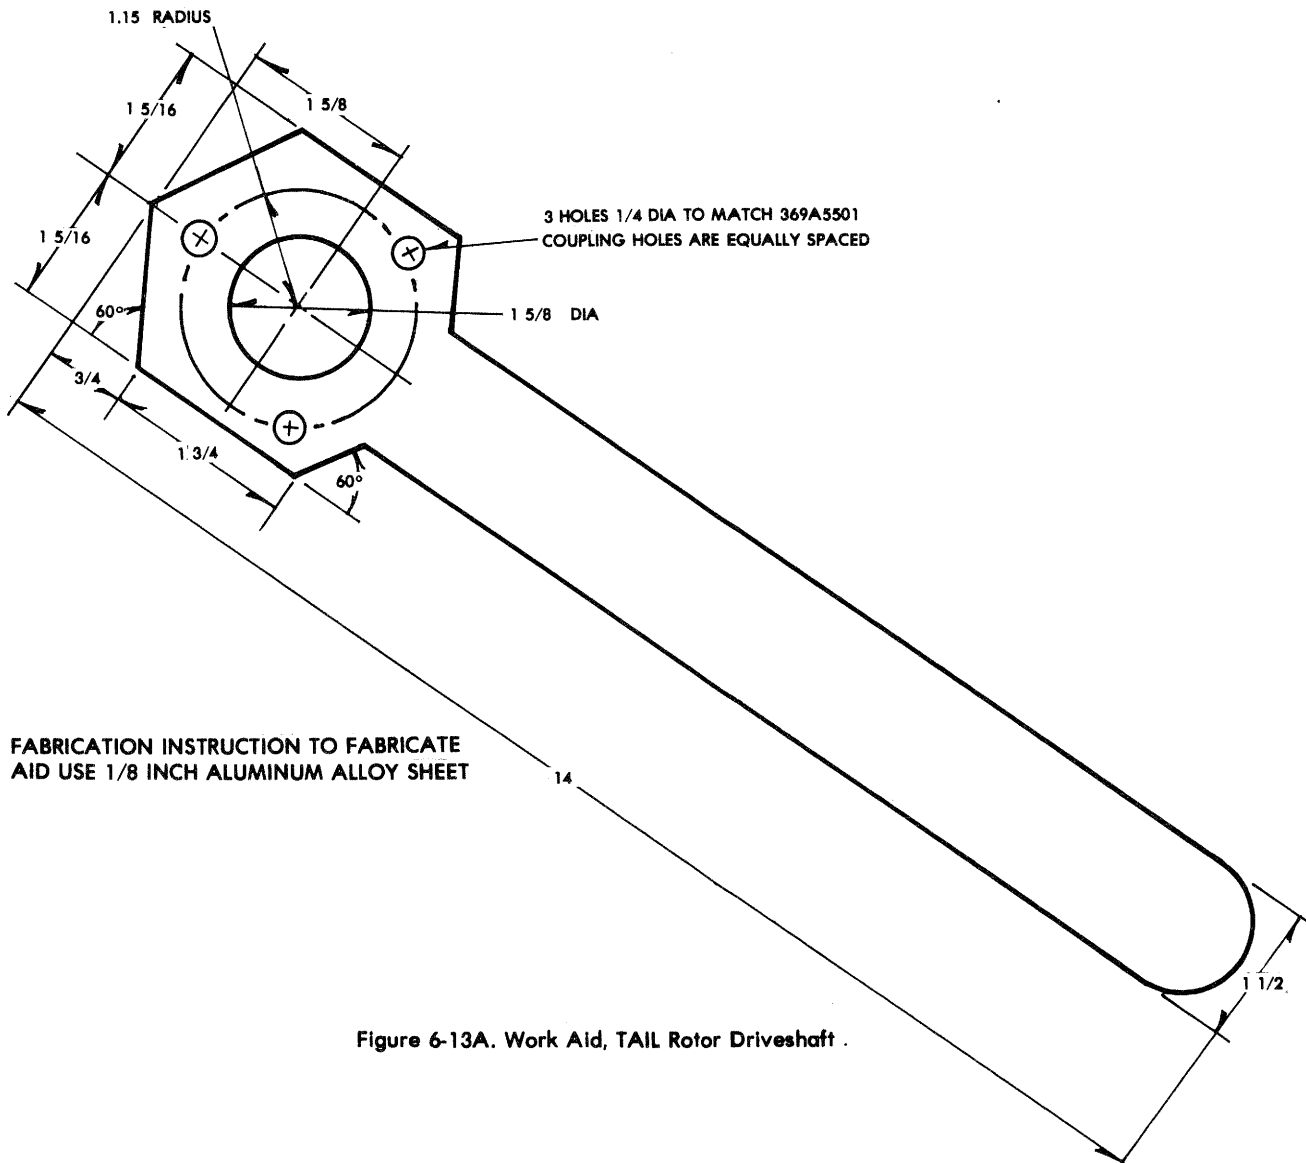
A. Work Aid, TAIL Rotor Driveshaft .
